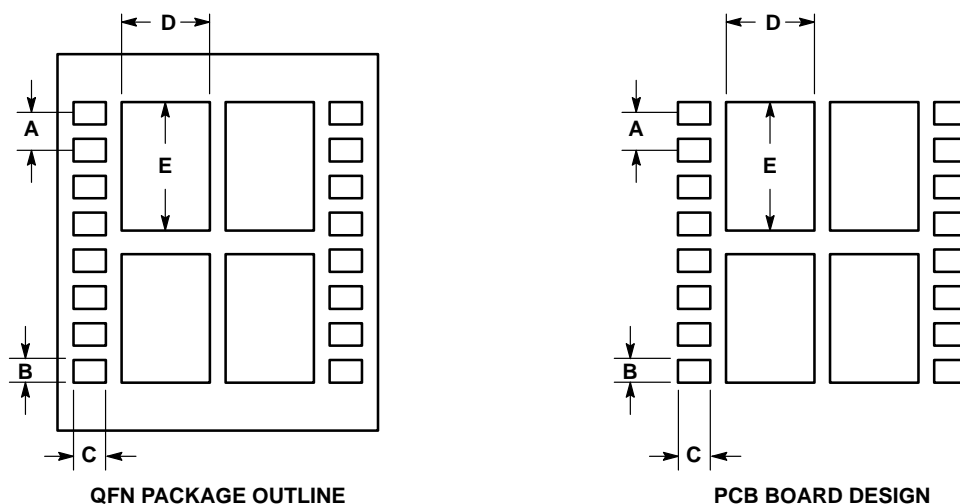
Printed Circuit Board Layout using Non-solder Masked Defined I/O Pads
